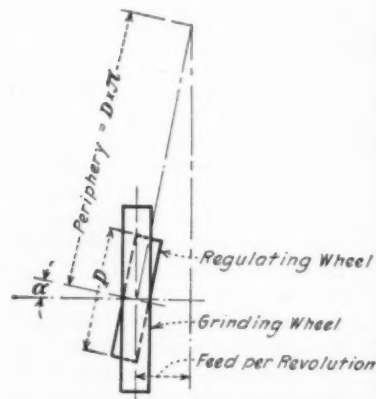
ADJUSTMENT OF REGULATING WHEEL FOR FEEDING
